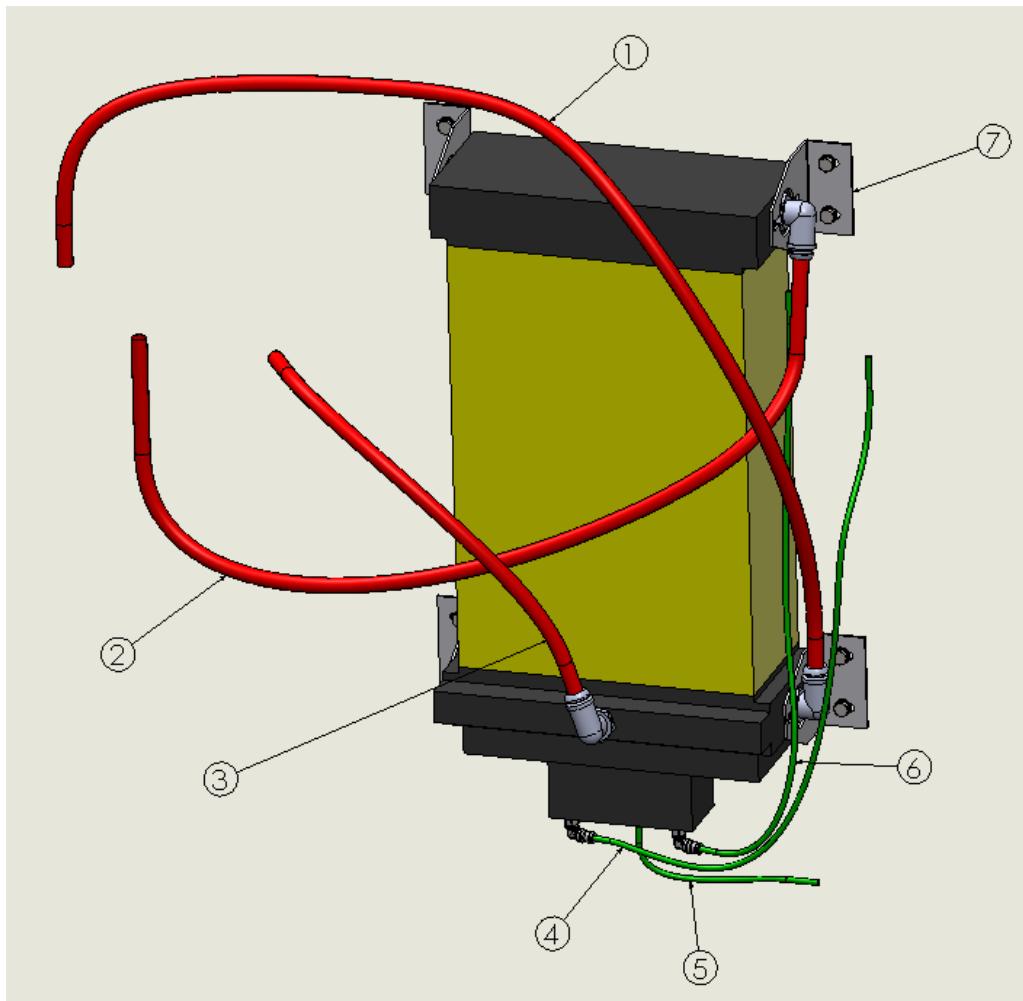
Hoses to disconnect when removing the dryer unit from the E Compressor
